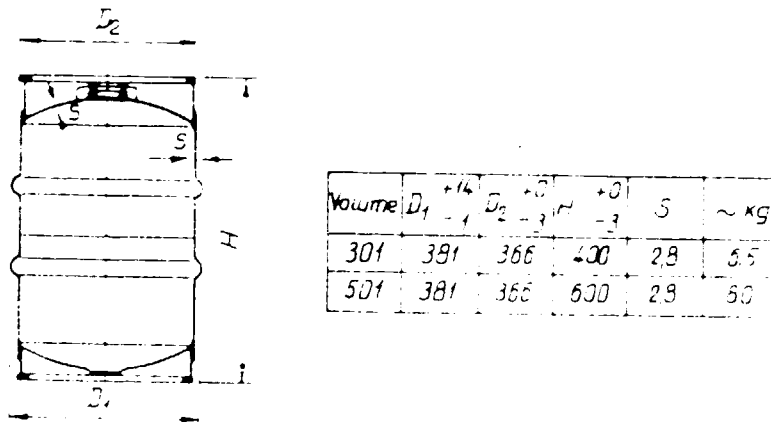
"Keg"-type beer cask with three circular seams and welded tap-hole
